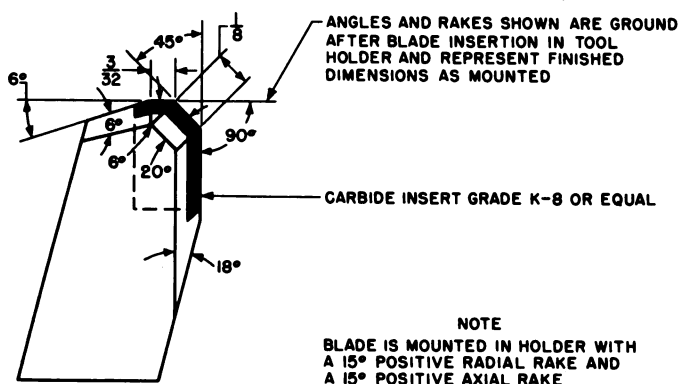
Face Mill Cutting Blade Rake and Angles for Machining Hafnium.
